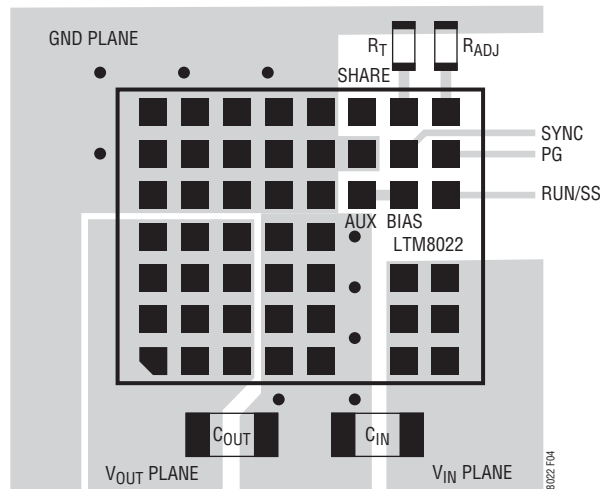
Layout Showing Suggested External Components, GND Plane and Thermal Vias
